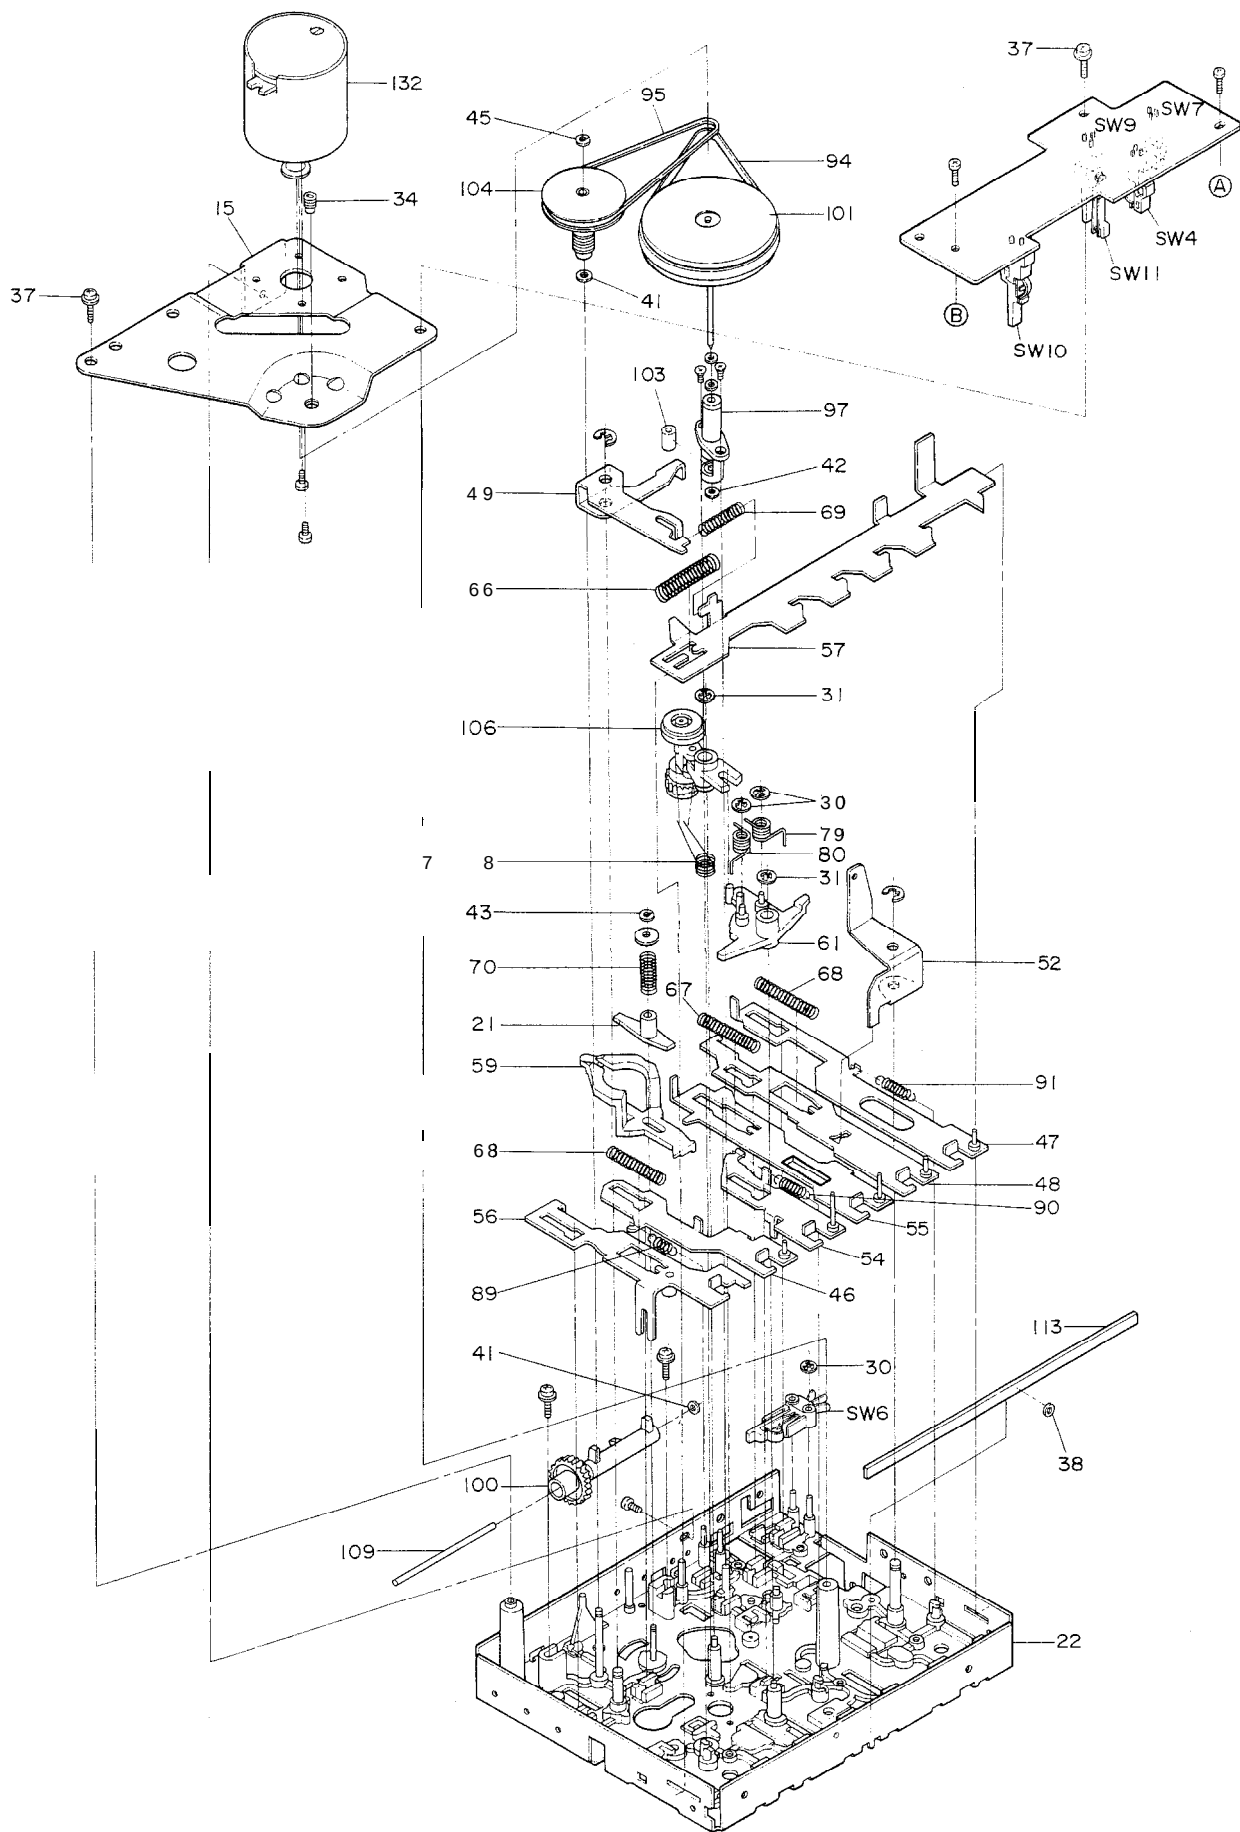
MECHANISM EXPLODED BOTTOM VIEW
